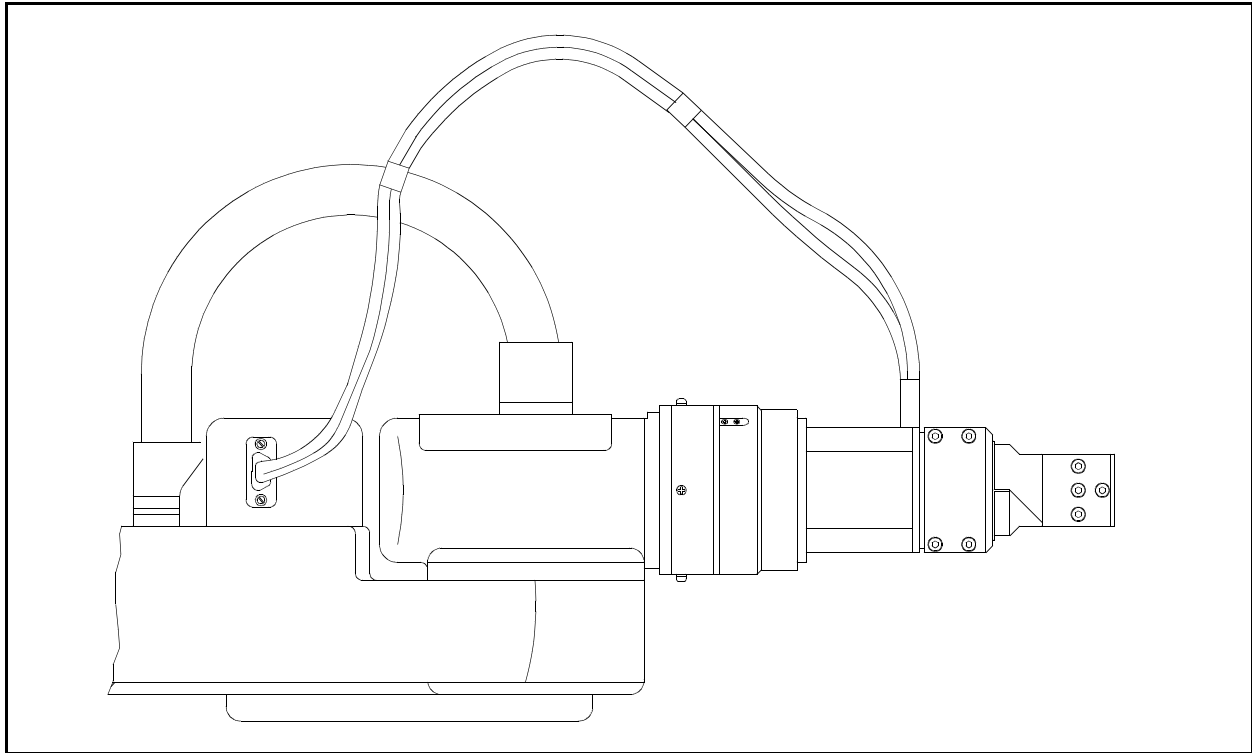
Connecting Gripper Cable to PERFORMER-MK2
